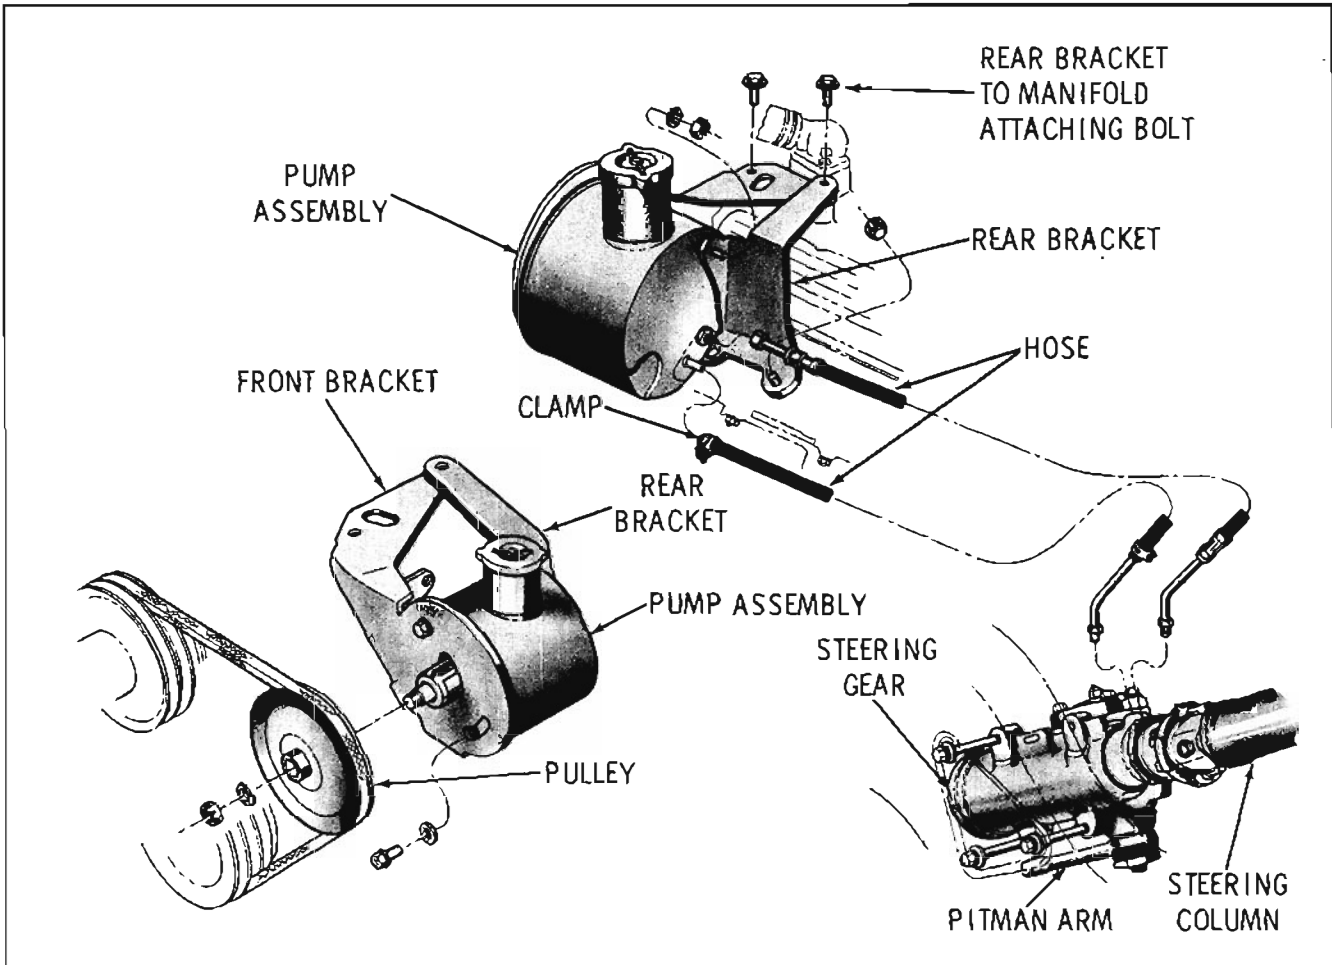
Pump Mounting (34 - 35 - 36 - 38 & 39 Series)
